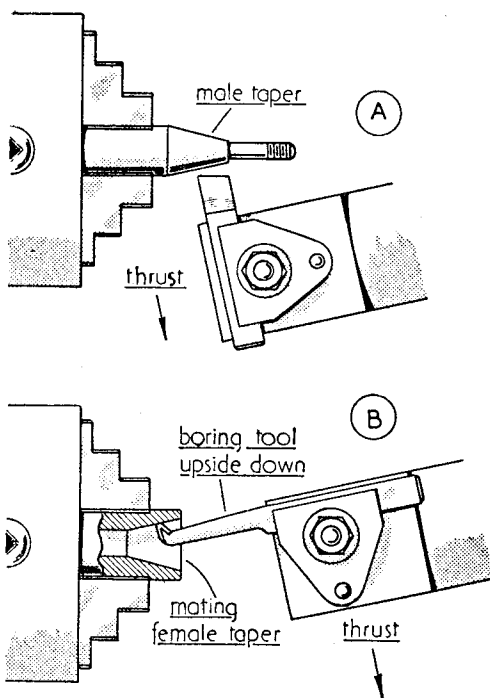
"A"—turning an external taper; "B"—machining the corresponding internal taper with the tool reversed
